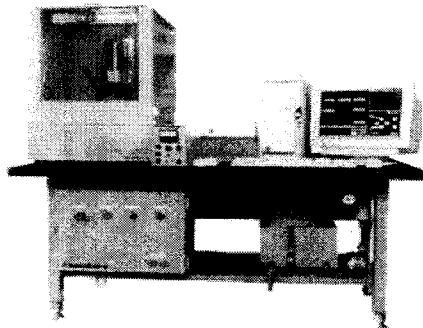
External view of Ultraprecision Micro-form Generating Machine
